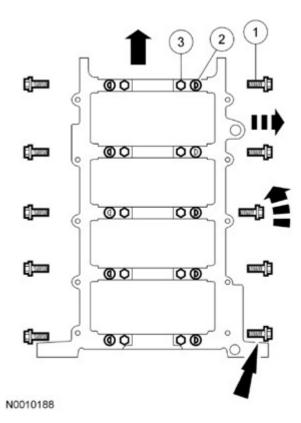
Removing Main Bearing Cap Fasteners Courtesy of FORD MOTOR CO.
